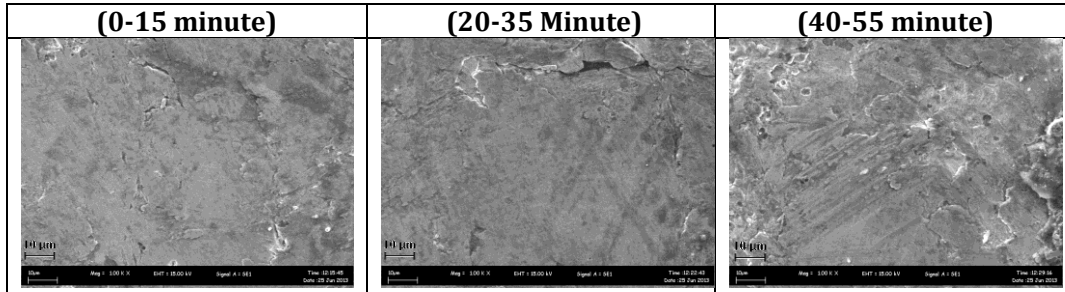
Surface profiles after machining FC300 at the cutting speed of 99 m/min.
